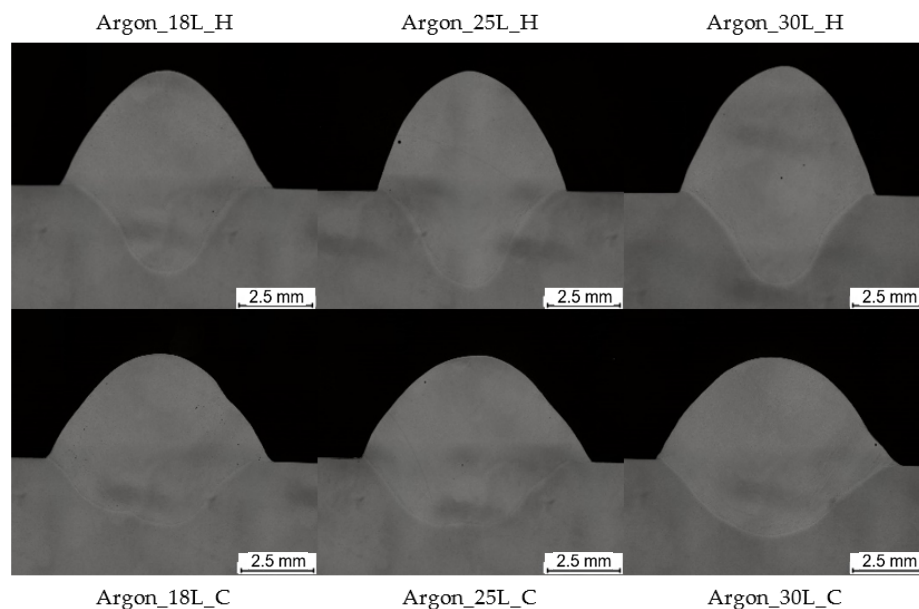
Cross-sections of single weld beads with cold metal transfer (CMT) and Argon Q1 shielding gas.
